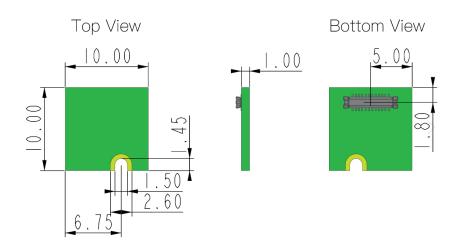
RAK1901 WisBlock Sensor Mechanic Drawing
